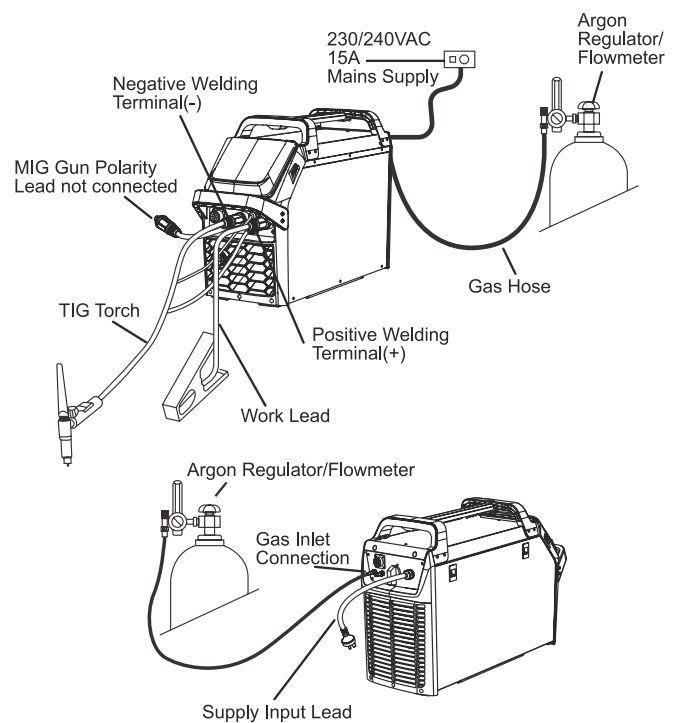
Setup For TIG (GTAW) Welding
